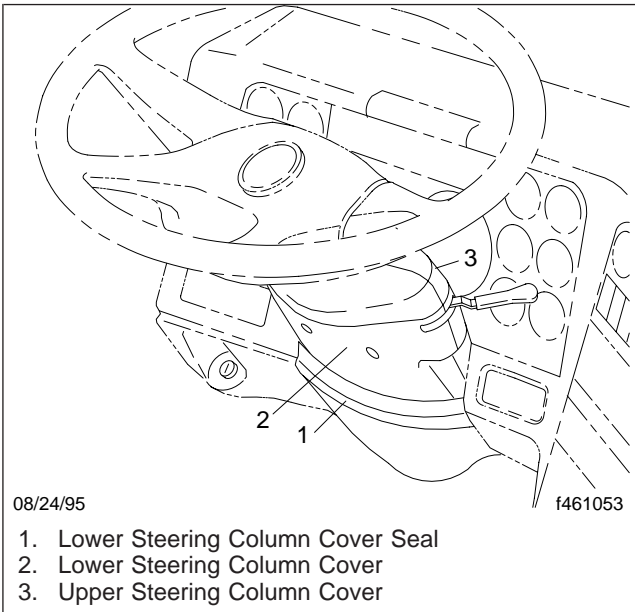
, Tilt Steering Column, Left-Hand Drive Shown
